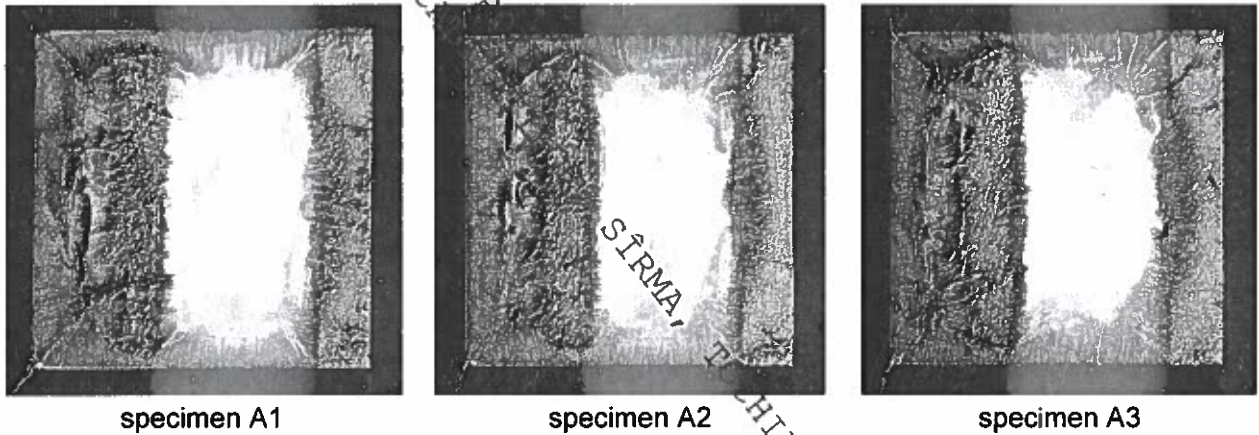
Top view of the fracture surfaces (one half of each specimen)
